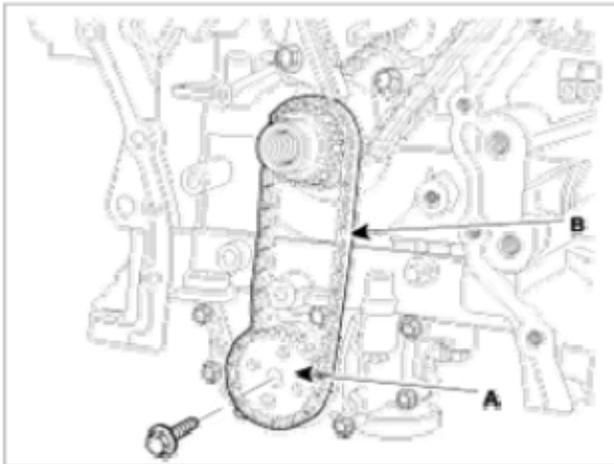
Locating Oil Pump Chain Sprocket And Oil Pump Chain
